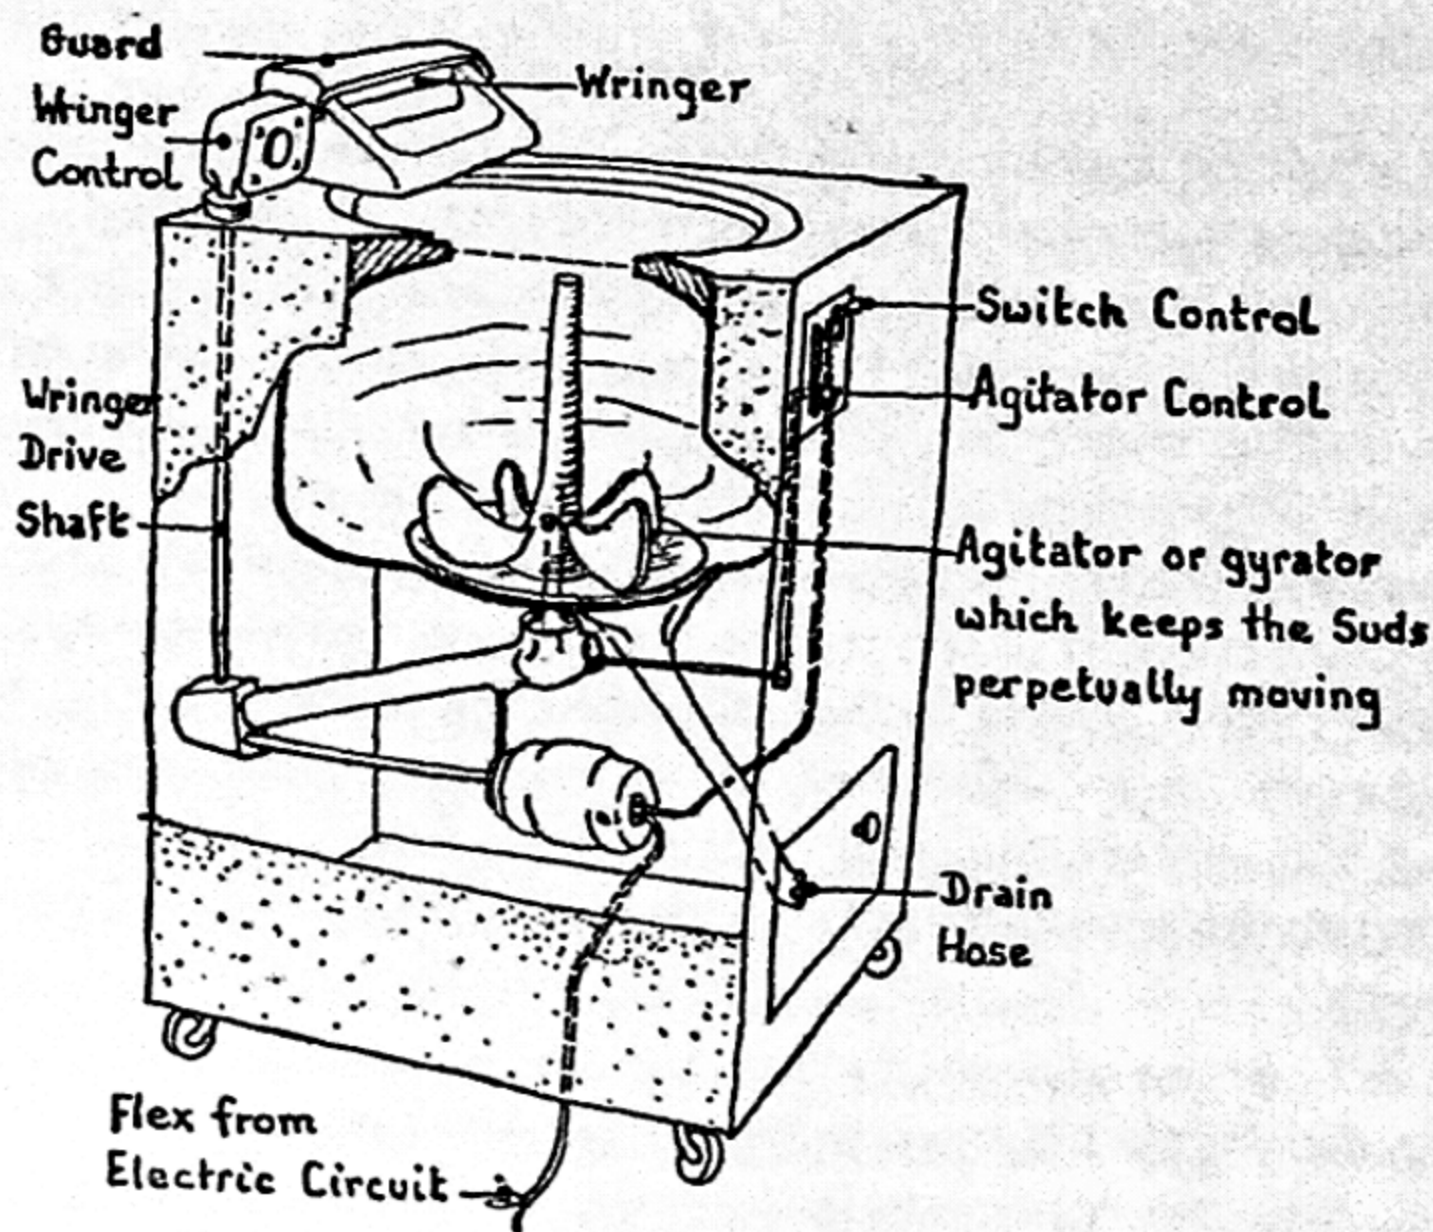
ELECTRIC WASHING MACHINE. Agitator type.
